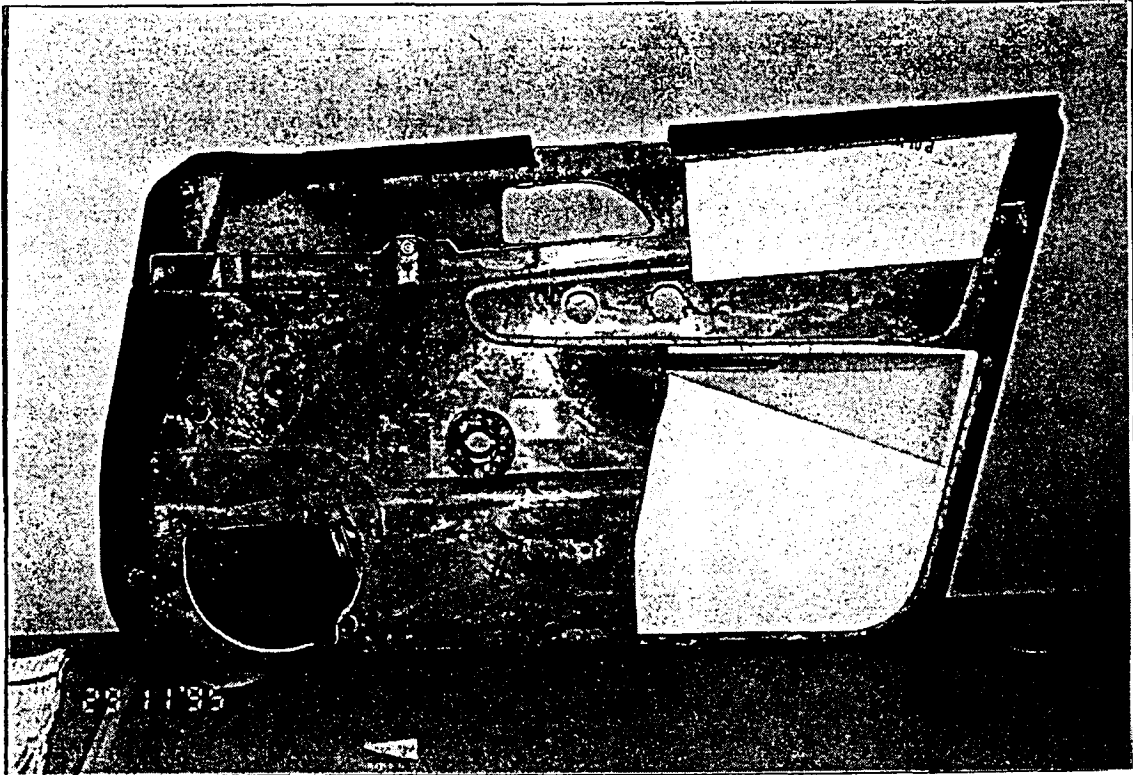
Modified Front Left Honda Accord Door Assembly (Viewed from Outside)
